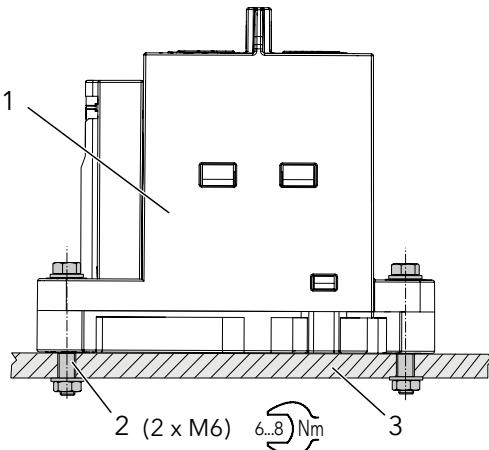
C303-XXX-G0P-...: Installing the contactor on the mounting plate
